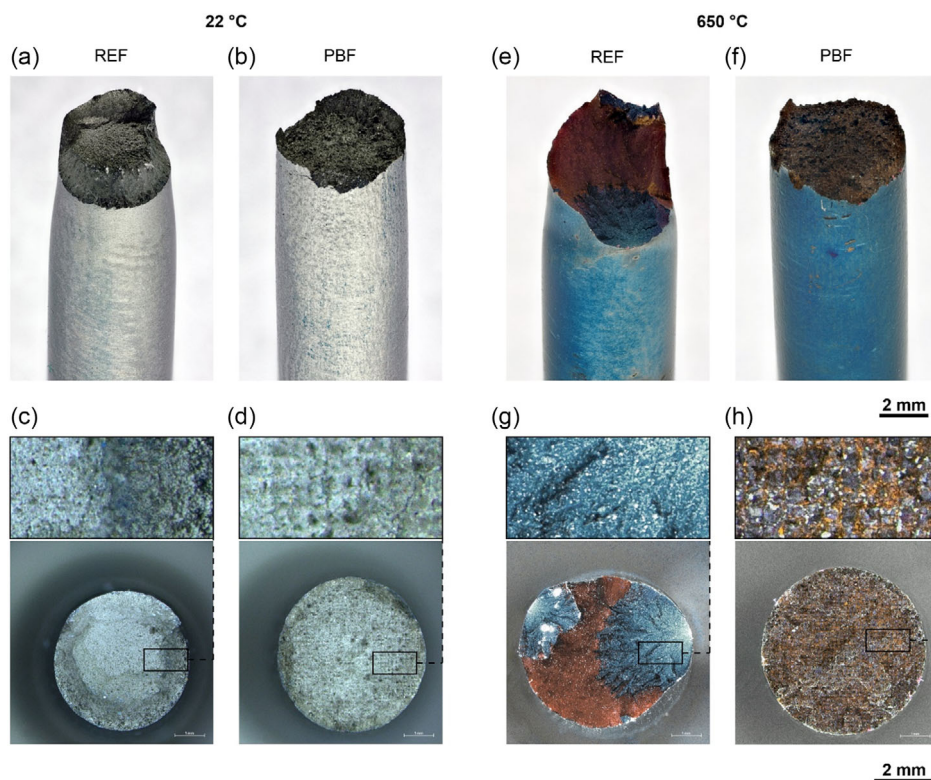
Fractured tensile specimens perspective view (macro photo in a,b) and e,f)) and fractured surfaces in the respective top view (OM). The small rectangular images on top represent enlarged details. a–d) RT and e–h) after testing at 650 °C.
